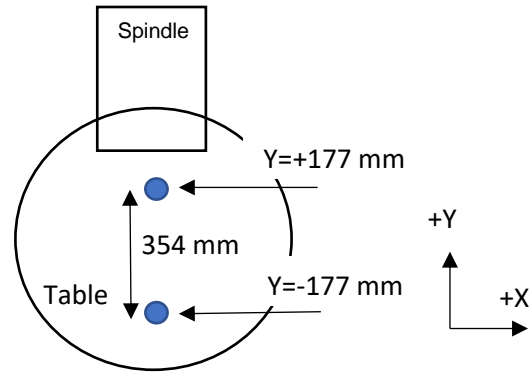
Schematic drawing of top-view, showing two master ball positions used for BK1 tests.
